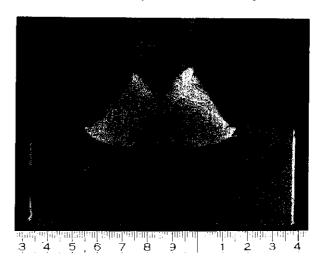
Macro section of full penetration fillet welded joint with 25-mm-thick web
